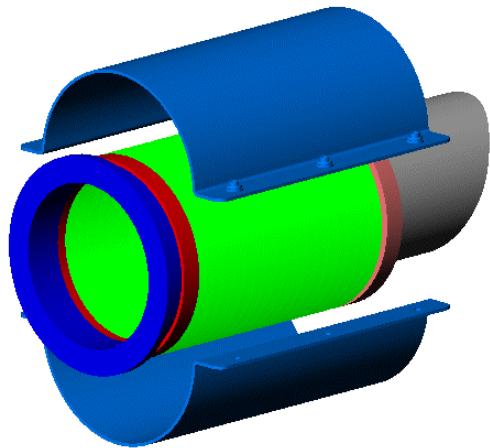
Cold mass bellows protector (exploded view).
